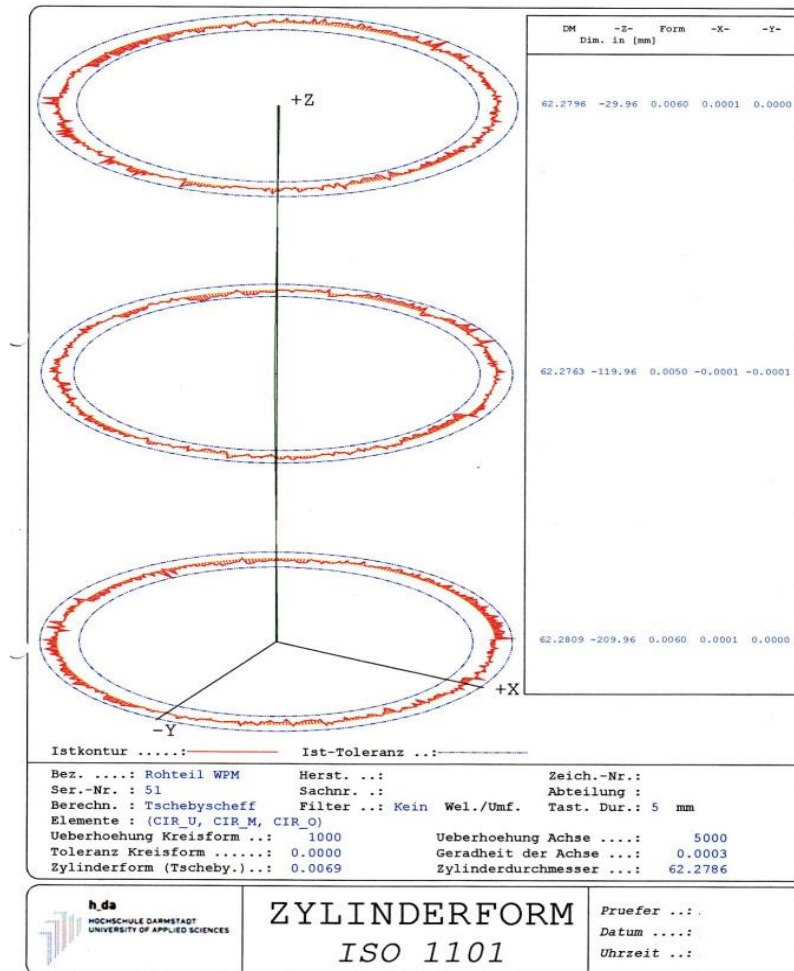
Cylindrical Toothing Zone / FORM OF CYLINDERS
